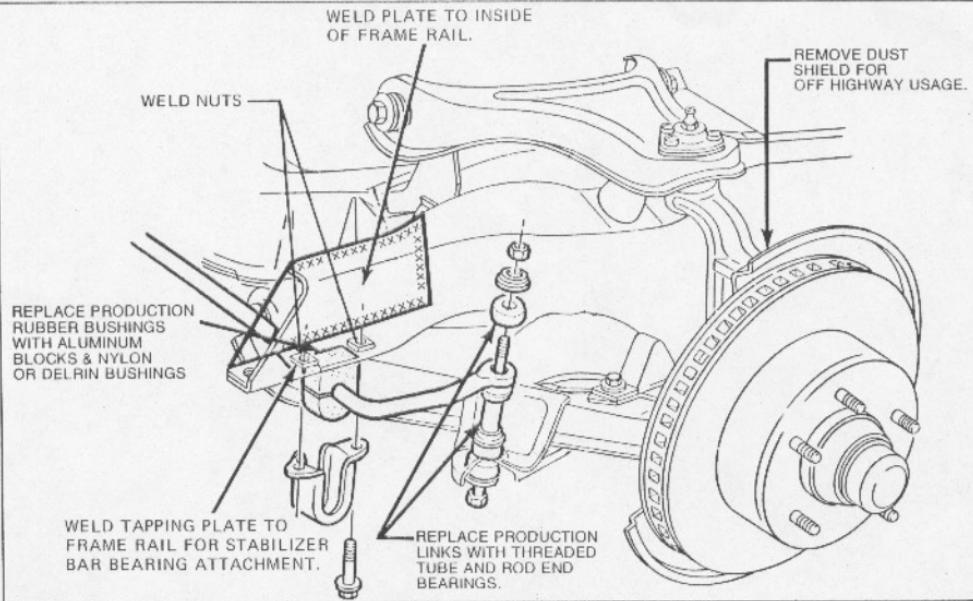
Weld tapping plate to inside of frame rail for stabilizer bar bearing attachments.
